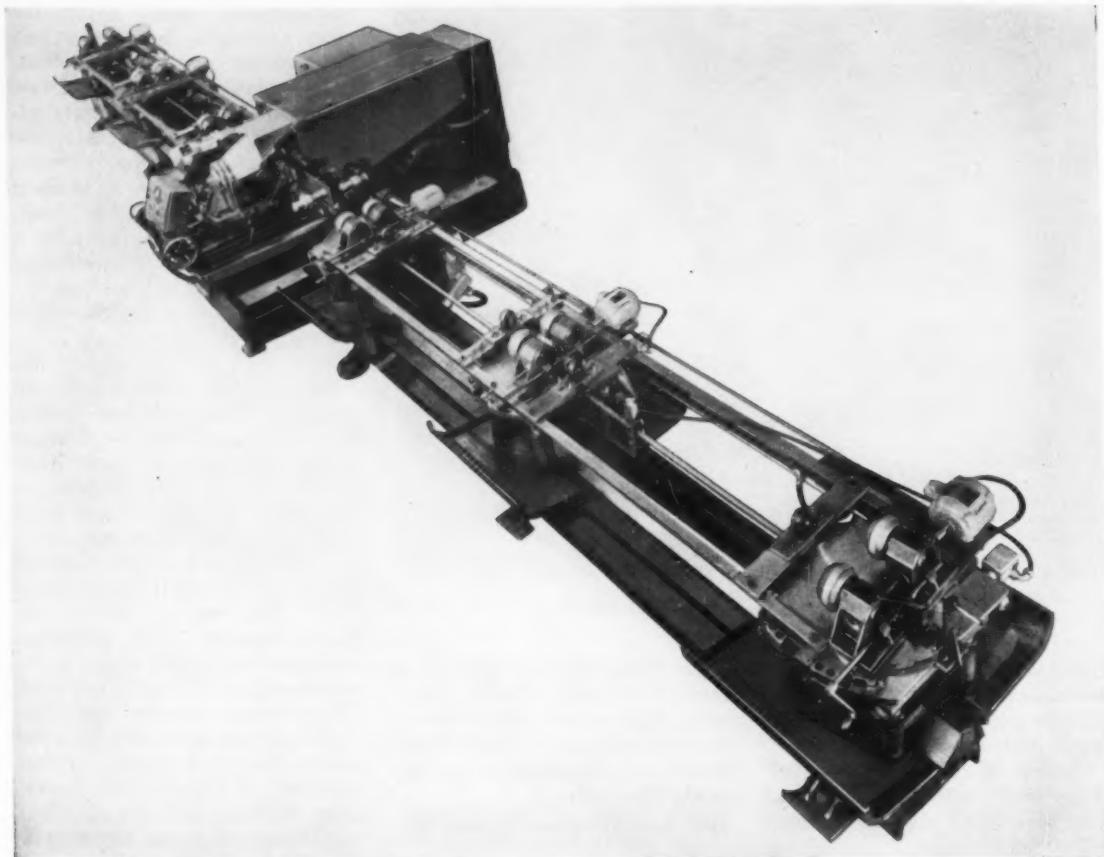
Heavy-duty centerless belt grinder for precision grinding and finishing rod or tubular stock
